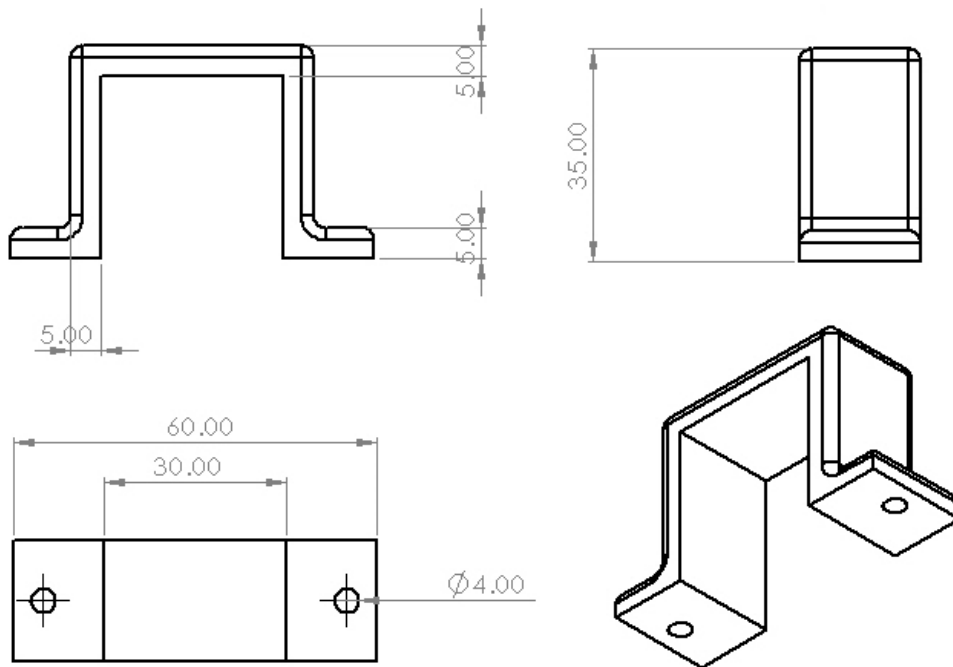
Model of motor cable guard. All dimensions in mm. Top Left: front view. Top right: side view. Bottom Left: top-down view. Right: 3D view.
